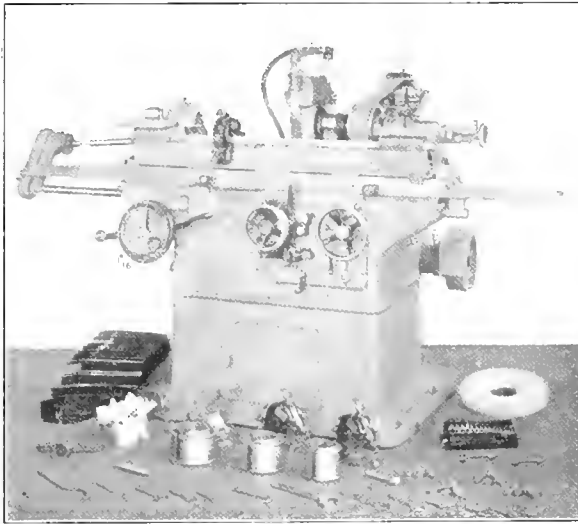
Brown & Sharpe No. 11 Plain Grinding Machine
